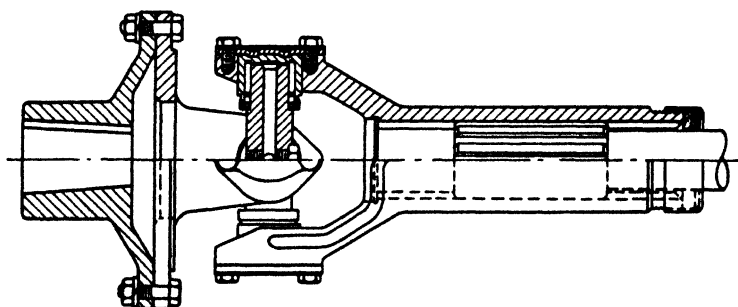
NEEDLE-BEARING TYPE OF UNIVERSAL JOINT WITH COMPANION FLANGE (BLOOD BROTHERS).
